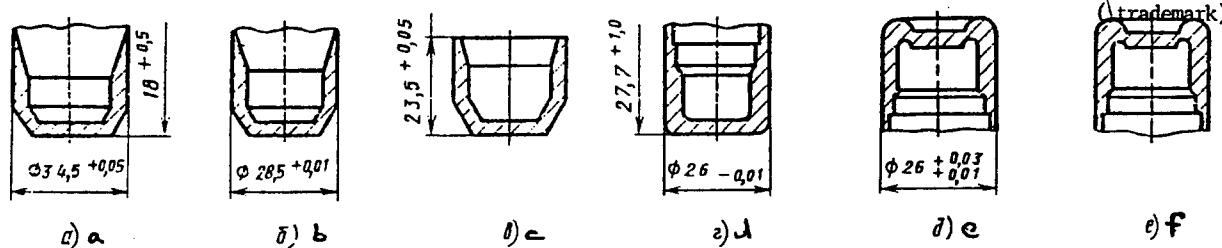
Process Flow of the Machining of the Outer Ring of a 943/20 Bearing: a. blank; b. secondary draw-forming; c. facing; d. final draw-forming; e. calibration; f. applying the trademark
